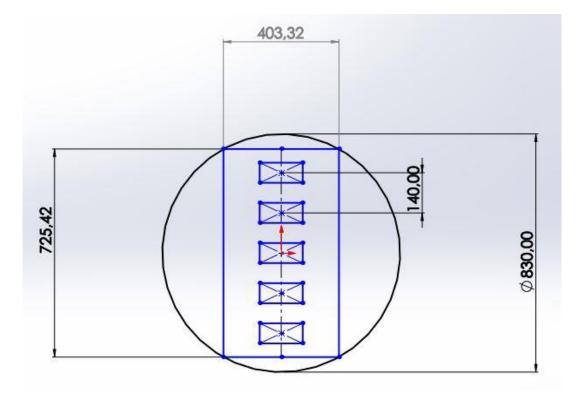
CYLINDER HEAD MACHINING, POSITIONING 2
